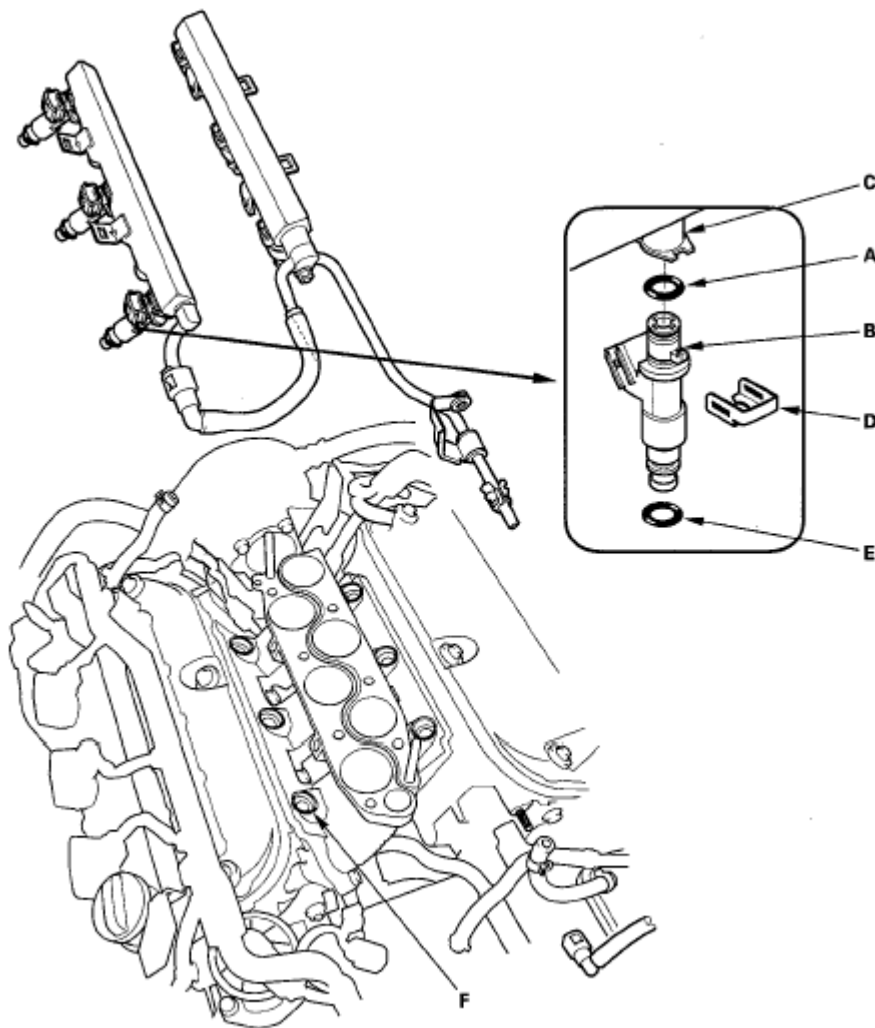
Identifying O-Rings, Injectors And Fuel Rail
